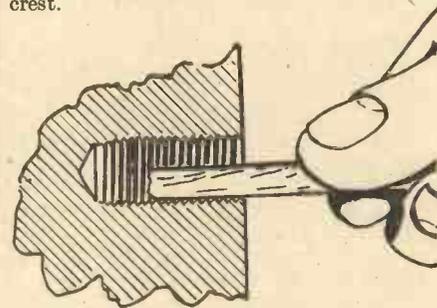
A simple method of measuring the pitch of a female thread by impressing the screw-thread on a piece of wood.
